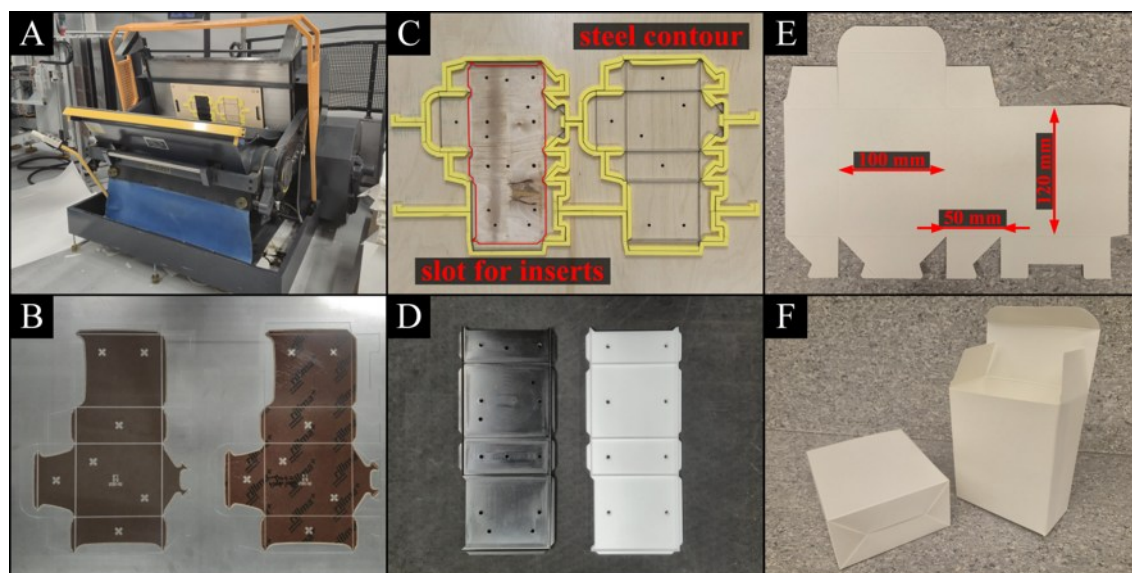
Cutting and creasing tools: (a) an industrial die cutter with installed tools; (b) a lower metal plate with matrices; (c) a die with two cutting and creasing contours; (d) POM (black) and PTFE (white) inserts; (e) a flat carton blank produced with the die; and (f) ready-made cartons folded from the blanks
